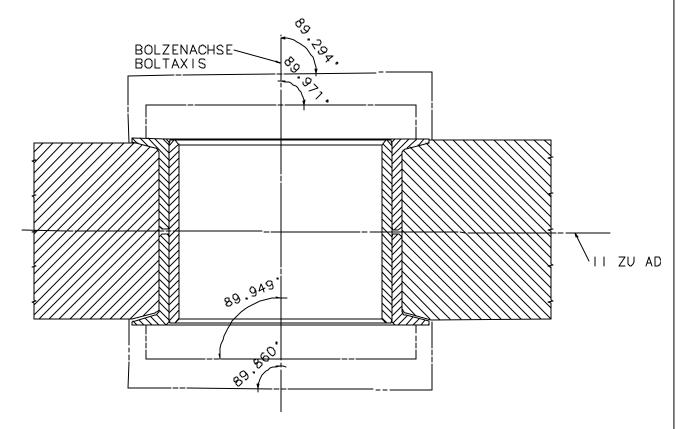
Orientation of the bushing to the attached fitting in the direction of cut B15-B15 at the first incoming inspection (results of a coordinate measuring device)
